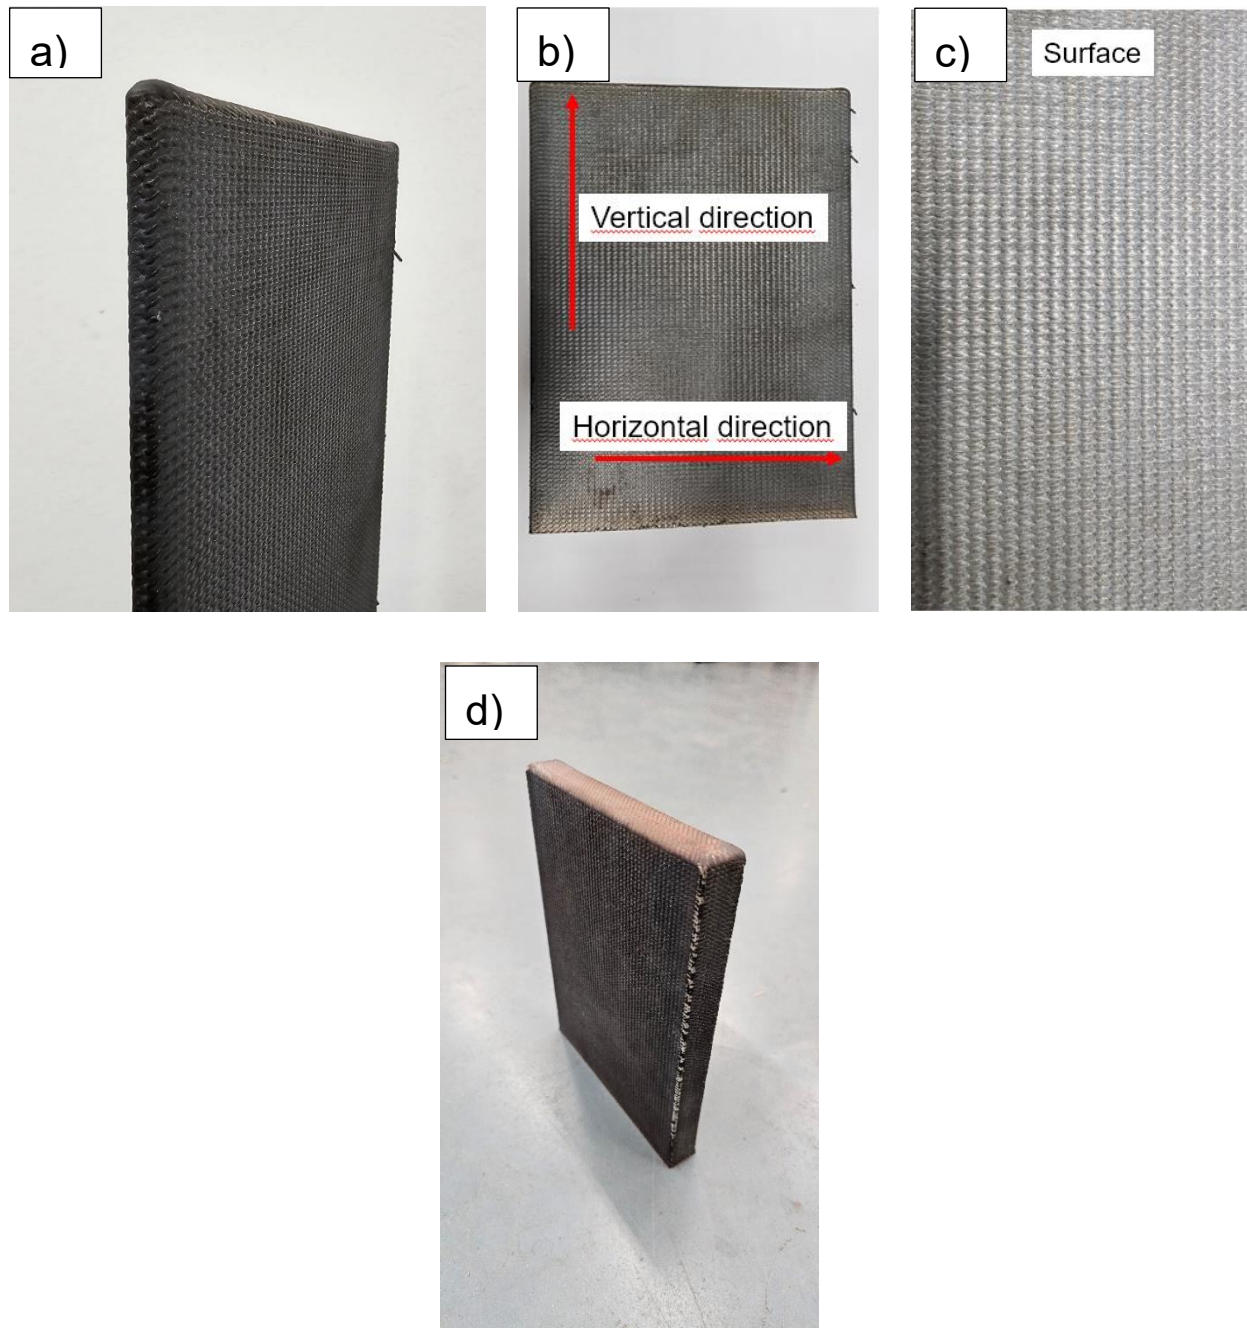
(a) Thin part; (b) Printing directions of the thin part; (c) Surface of the thin part and (d) Thick part.
